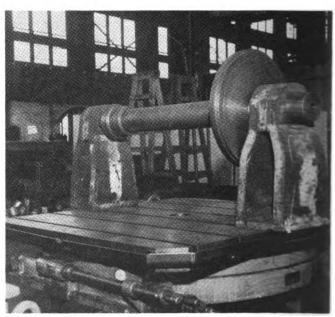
Pinion mandrel end of jig which automatically aligns surfaces bored in set-up No. 1.
